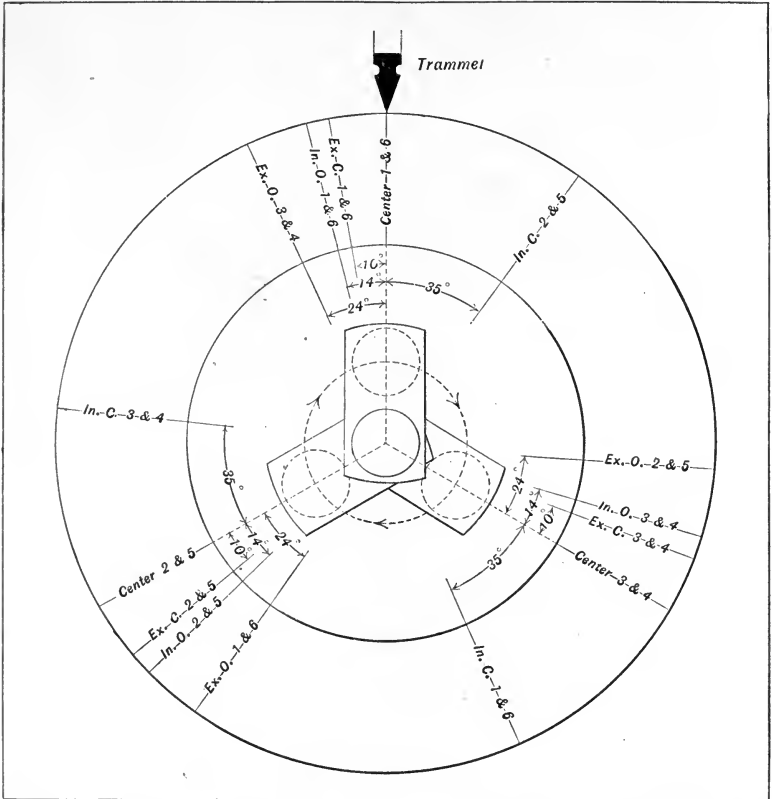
Showing Method of Marking Rim of Six-Cylinder Fly Wheel for Guiding Repairman or Motorist to Retain Correct Valve Timing.
